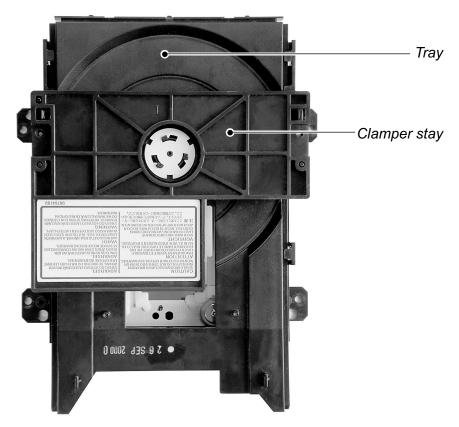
Mechanism chassis assembly (Top side)
